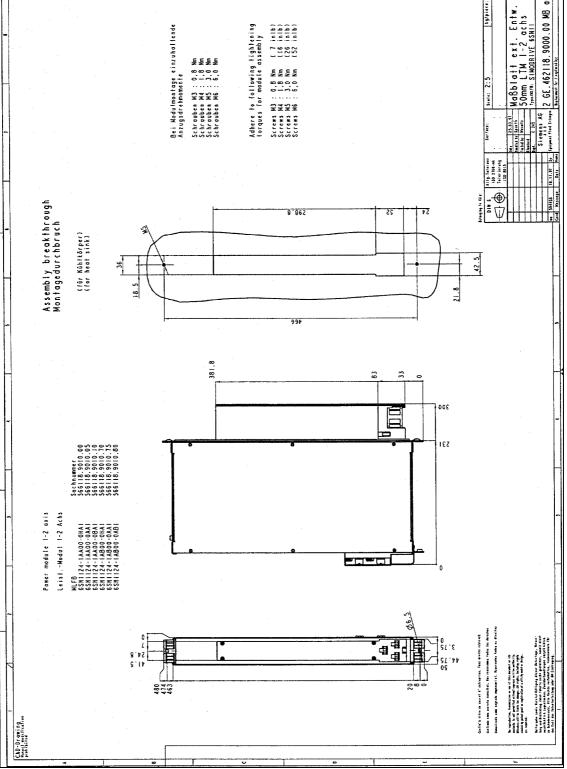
External cooling, power module 50 mm 1-2 axes
